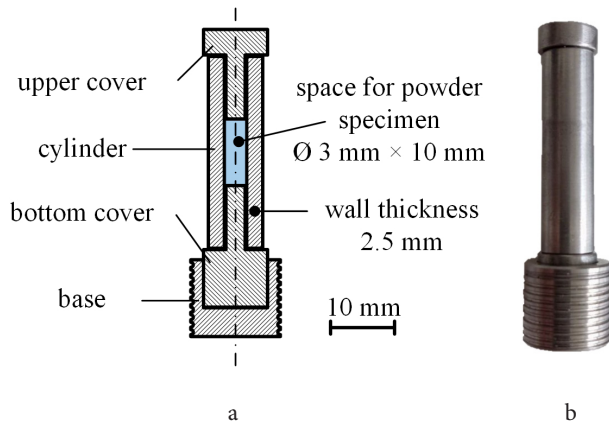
(Color online) Sectional scheme of the custom-made powder container of Ti-32.4Zr (at.%) alloy (a) and photograph of the assembled container (b).
